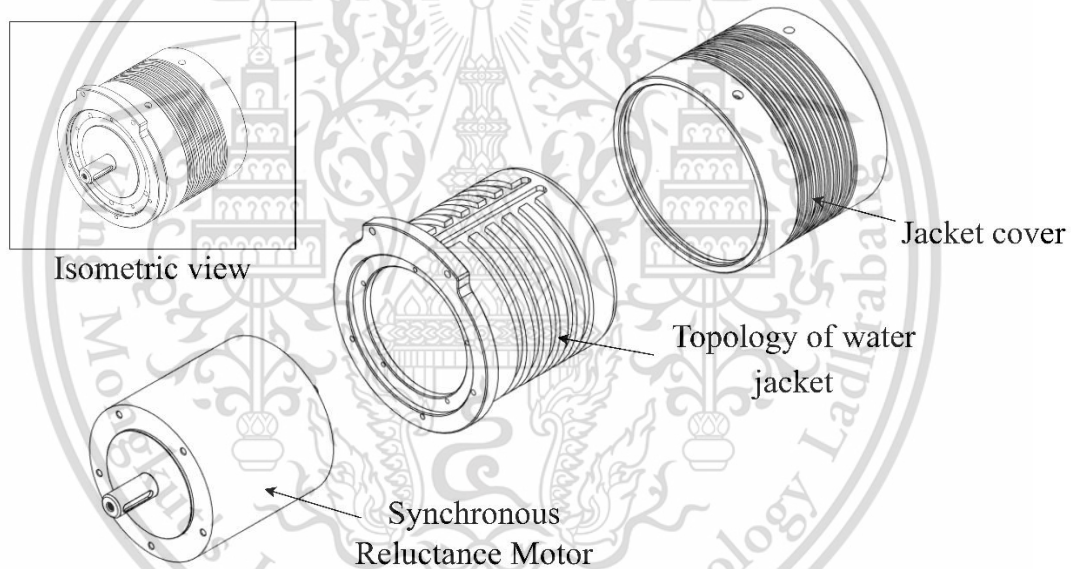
Exploded View of Motor-water-cooling jacket Combination.
